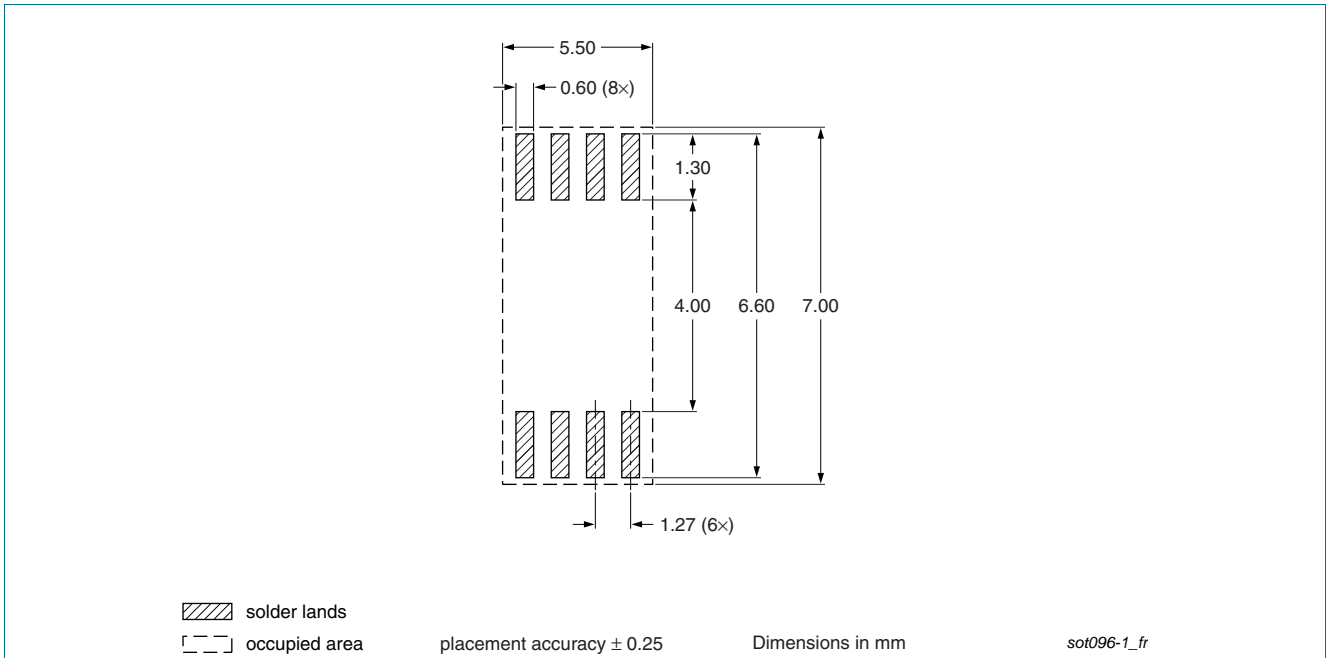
Reflow soldering footprint for SOT96-1 (SO8)
